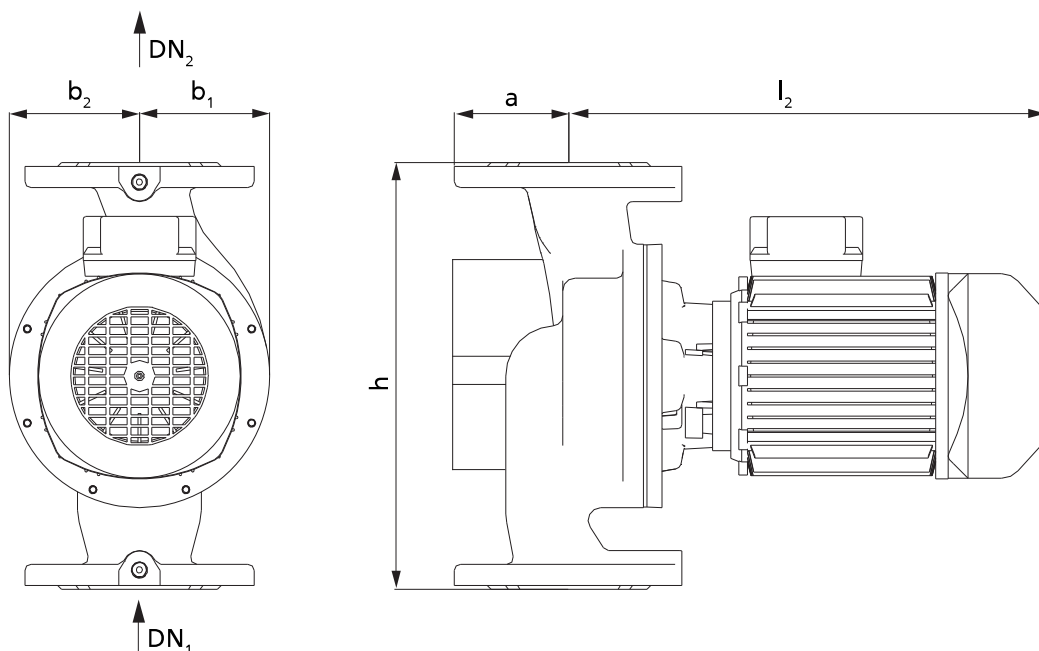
Dimensions of flanged pump set, size ≥ 032-032-100
